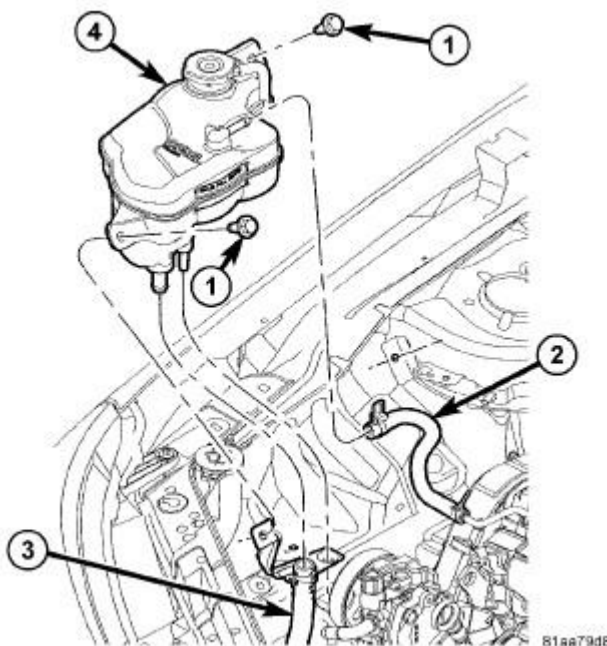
COOLANT RECOVERY CONTAINER - PRESSURE SYSTEM
